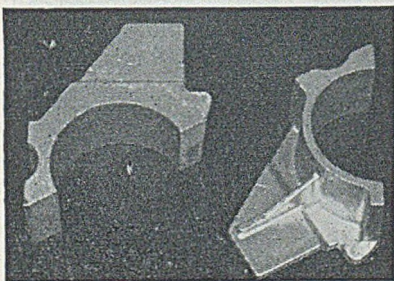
(left) Ordnance Motor Bracket Castings, As-cast.
